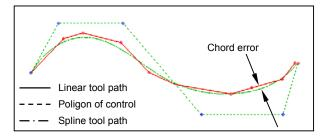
Tolerances required for calculating Spline tool paths.
